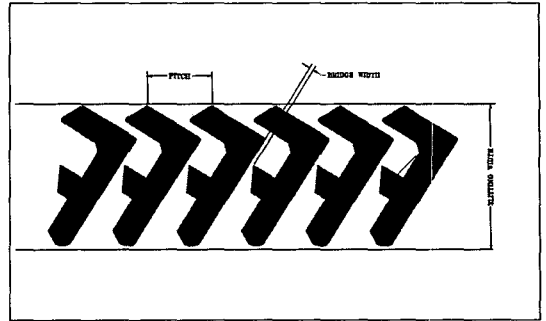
Definition of bridge width, slitting width and pitch in a strip layout
